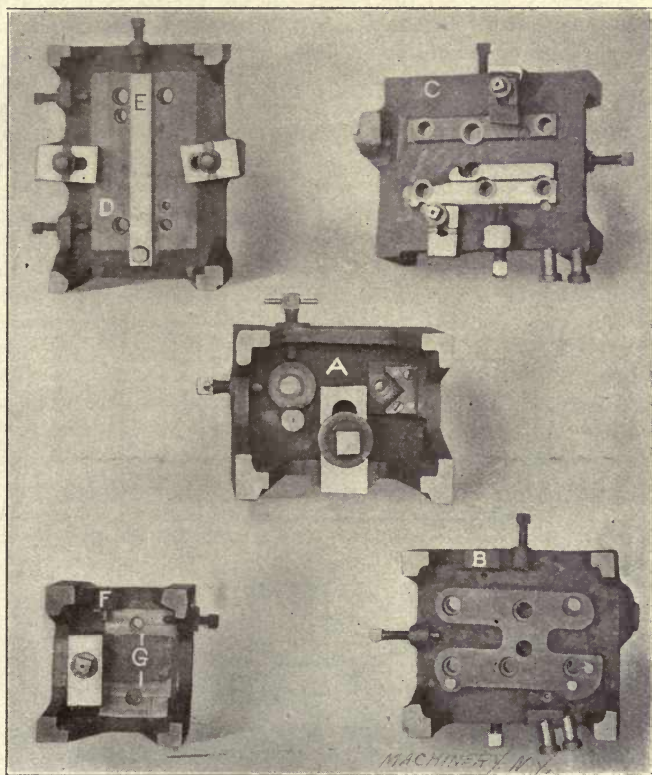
Miscellaneous Examples of Open Drill Jigs
